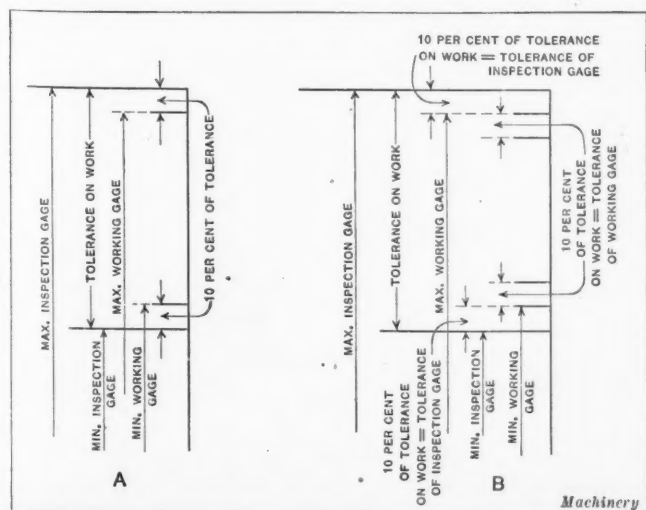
Diagrammatic Illustration showing Differences between Working and Inspection Gages, and Tolerances on these Gages
